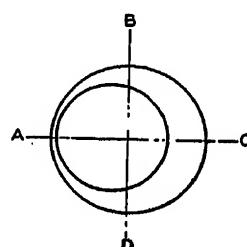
EXAGGERATED SKETCH SHOWING ROTOR OUT OF CENTER IN STATOR
